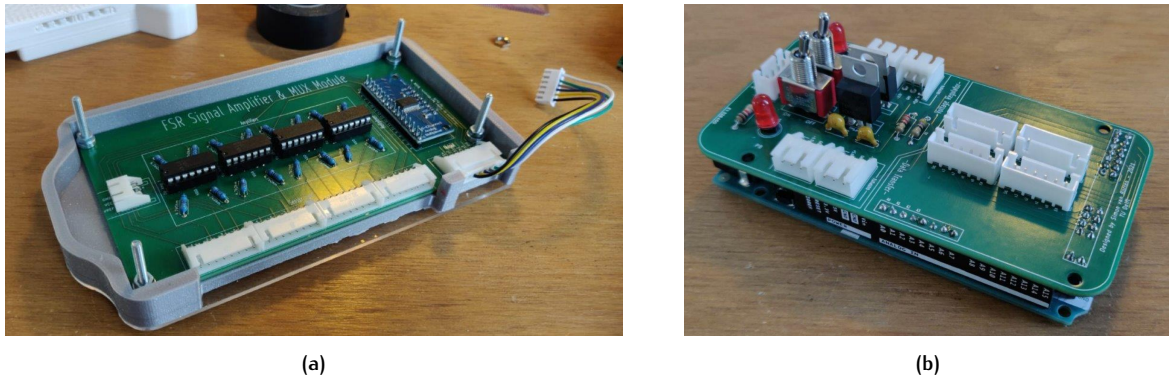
Figure showing a (a) fully assembled signal conditioning module in a 3D-printed test-housing and (b) a fully assembled voltage regulator & data-transfer module mounted on an Arduino Mega board. The circuit boards were designed for through hole soldering of the components. The routing of the circuit boards can be found in Appendix B.3 and B.2.
